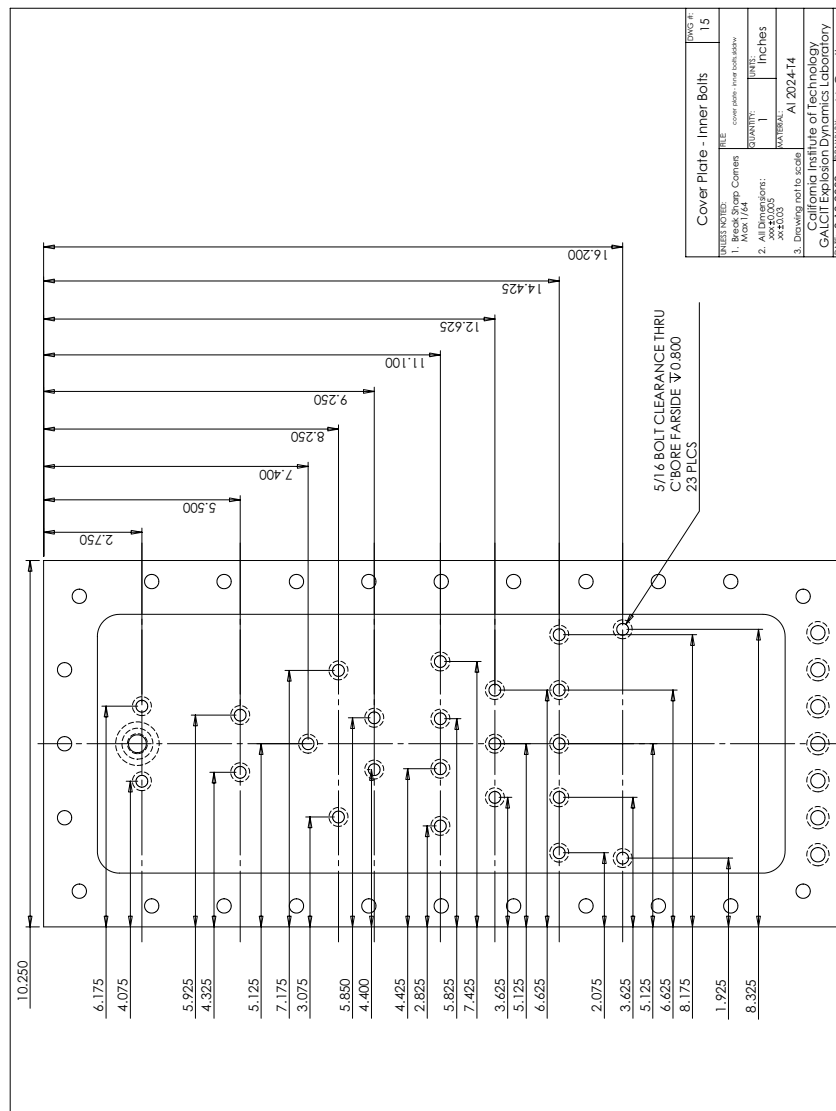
Cover Plate - Inner Bolts, Dwg No. 15
